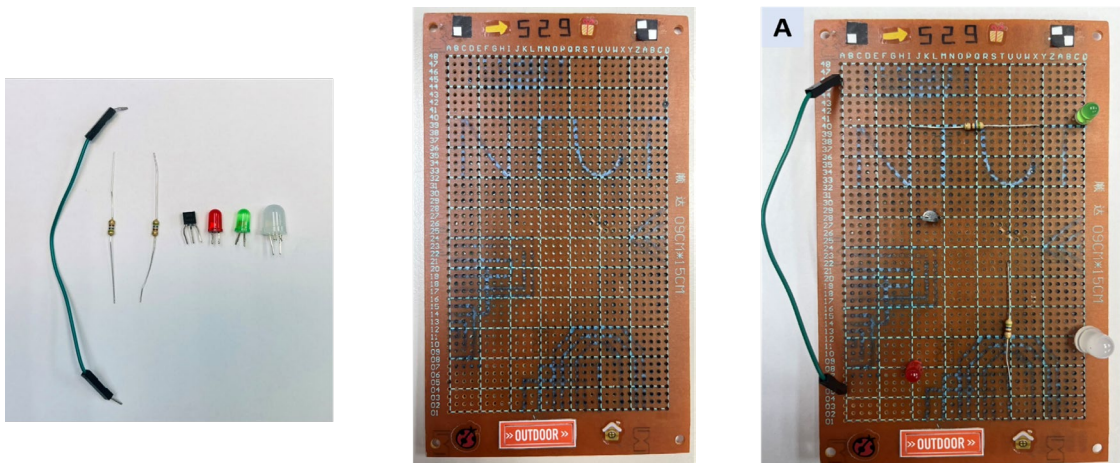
Electronics assembly task – (left) electronic elements used in the assembly tasks, (middle) front side of the circuit board, (right) final circuit layout of Task A.
